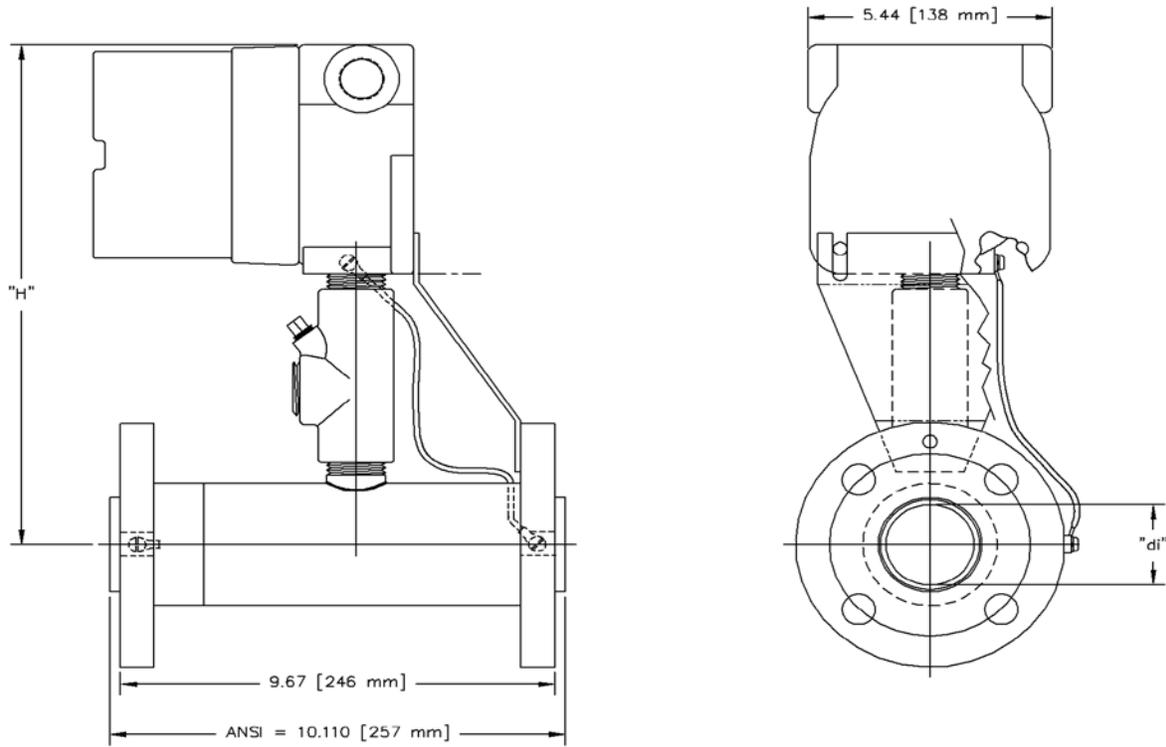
Typical DK 13 and DC 13 Dimensions (Hazardous)
